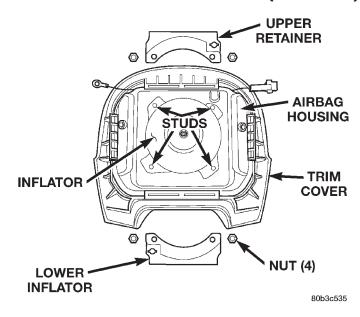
Driver Side Airbag Trim Cover Retainers Remove/Install
